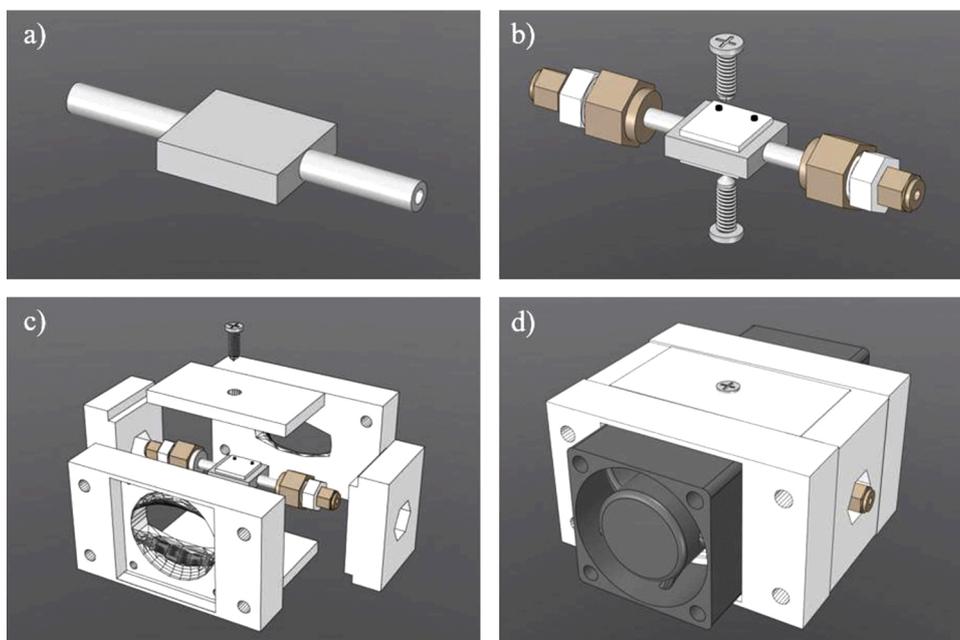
Miniaturized preconcentrator 3D design (a) Aluminum block machined and drilled. (b) Aluminum block (light grey), PEEK connectors (brown and white), ceramic resistances (white) and screws (dark grey) (c) System of the Fig. 1b inside its disassembled housing (white). (d) System of the Fig. 1c assembled with fans (dark grey).
